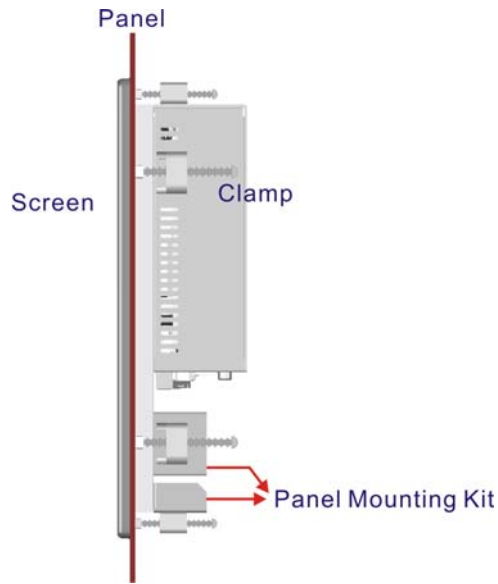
Tighten the Panel Mounting Clamp Screws
